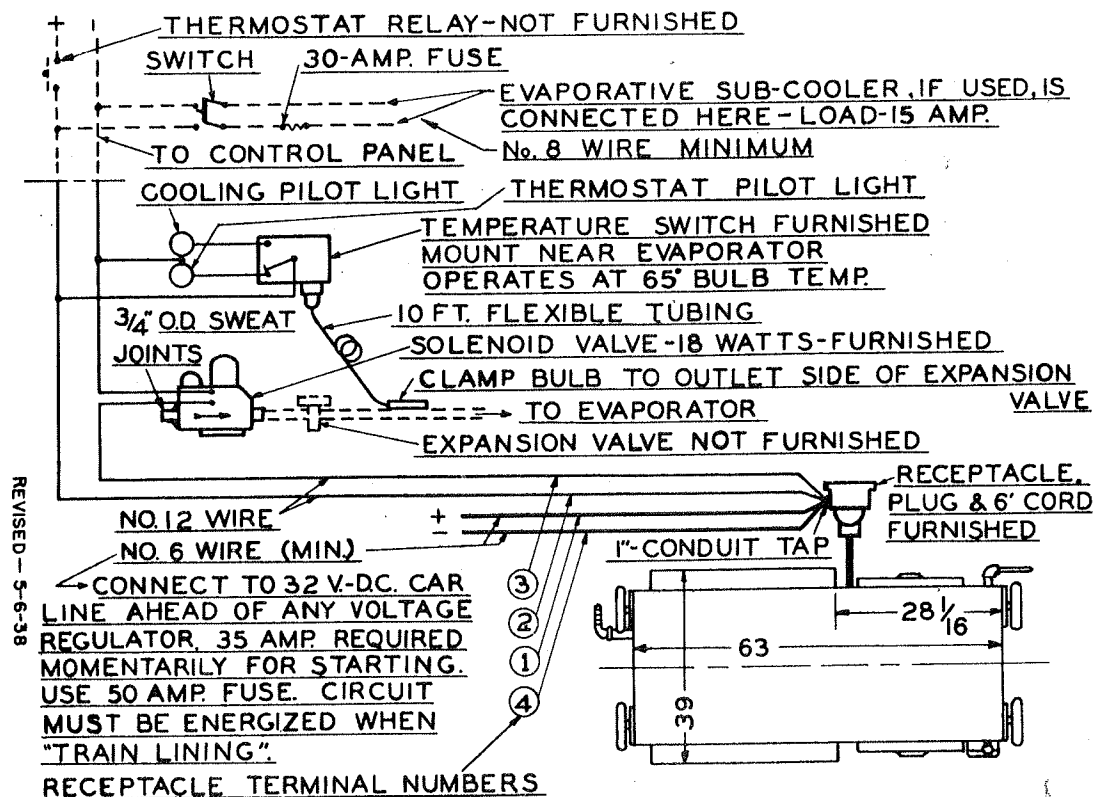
CAR WIRING FOR MODEL "C" ICE ENGINE UNIT (SK-252)
